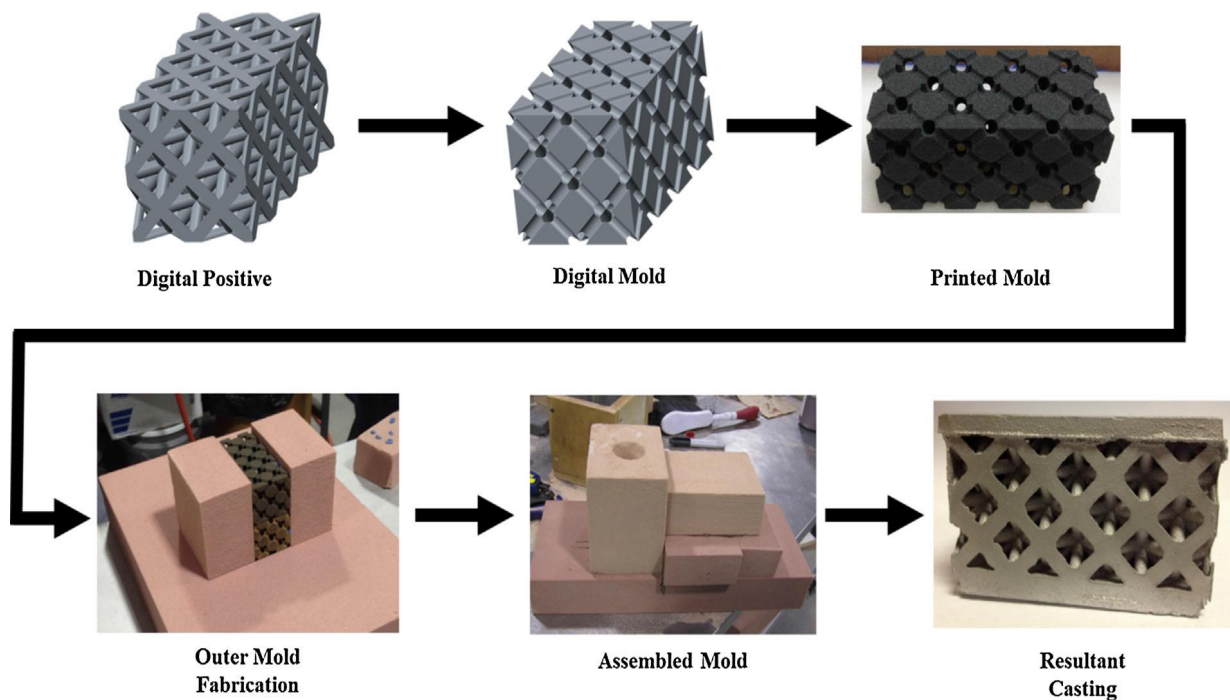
Manufacturing process for creating cellular castings - from digital mold to resultant casting. Figure taken from [9].
